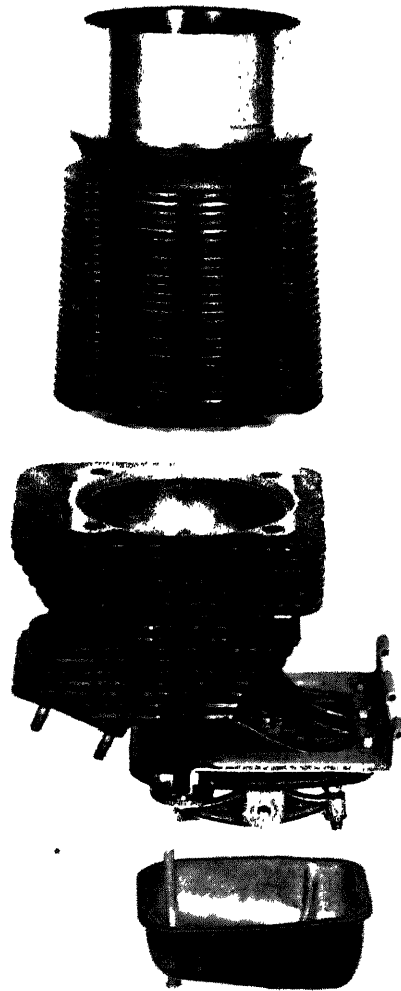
CYLINDER, CYLINDER HEAD AND ROCKER-BOX ASSEMBLY
